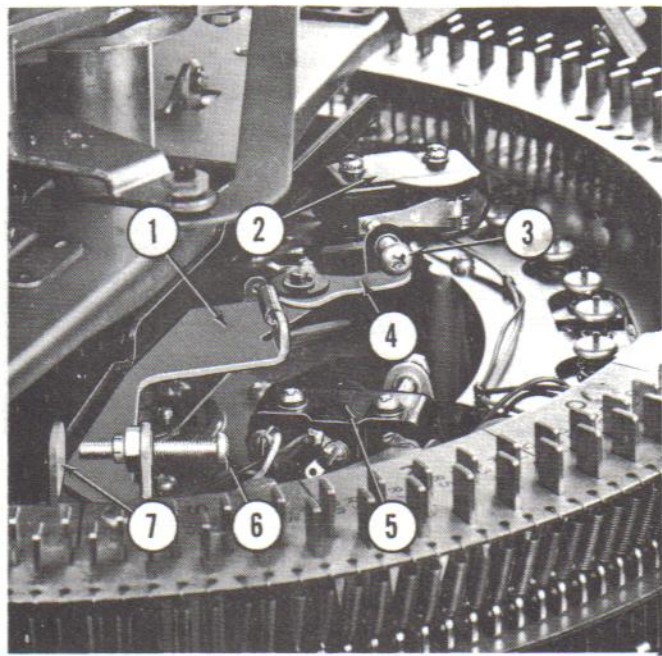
ACTUATING SCREW ADJUSTMENT, CARRIAGE SWITCH
